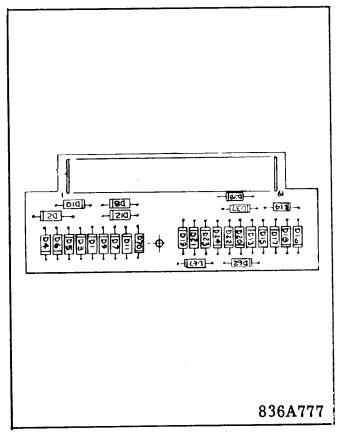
Printed Circuit Board Assembly for SDG, SDG-1, 2, 3, & 4 Relays
